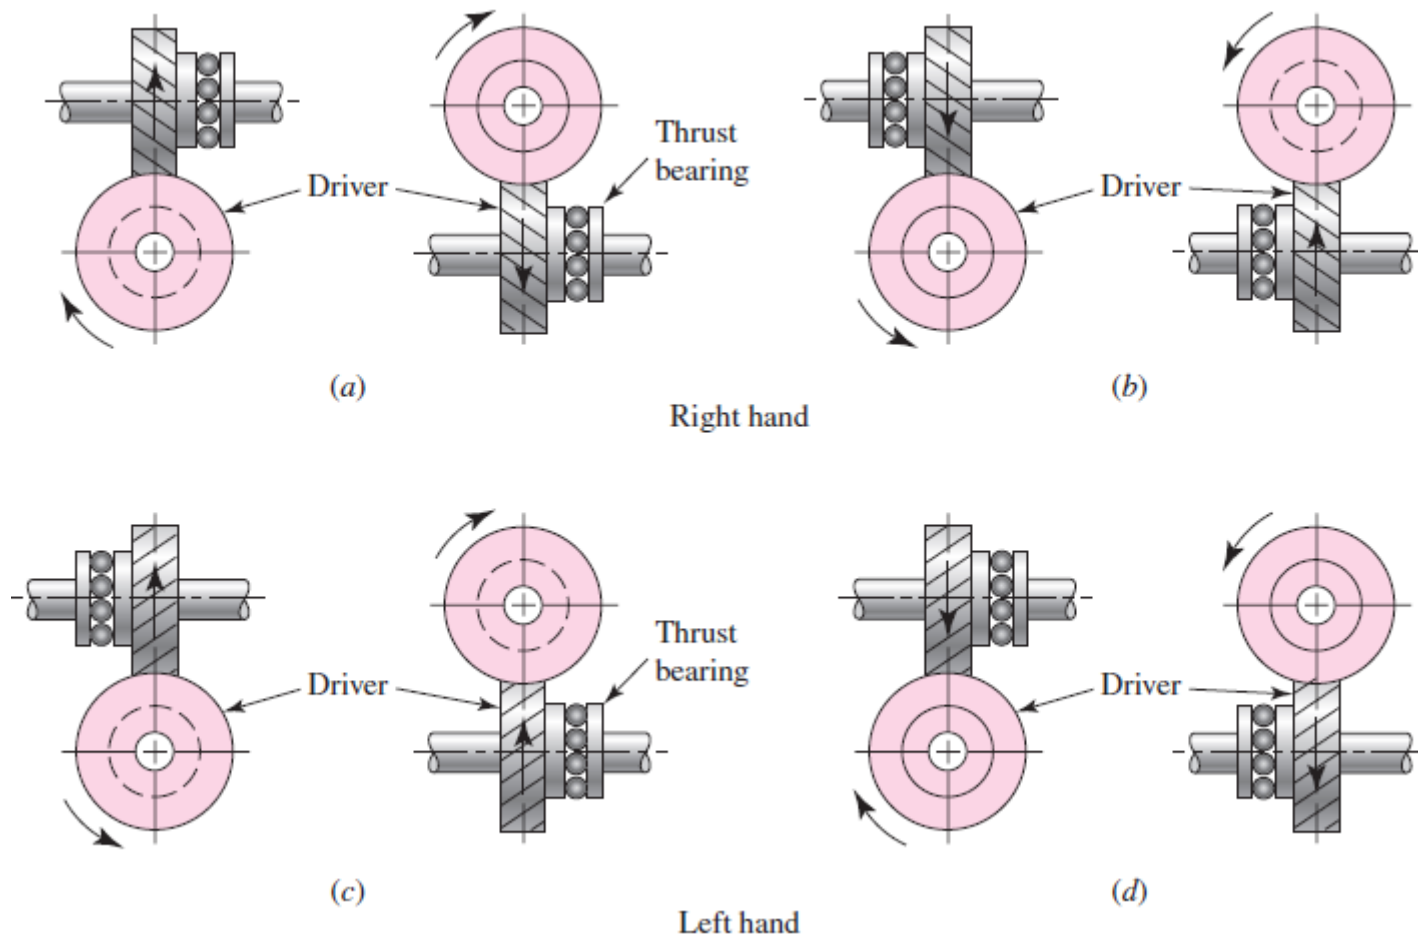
Thrust, rotation, and hand relations for crossed helical gears. Note that each pair of drawings refers to a single gearset. These relations also apply to worm gearsets.
